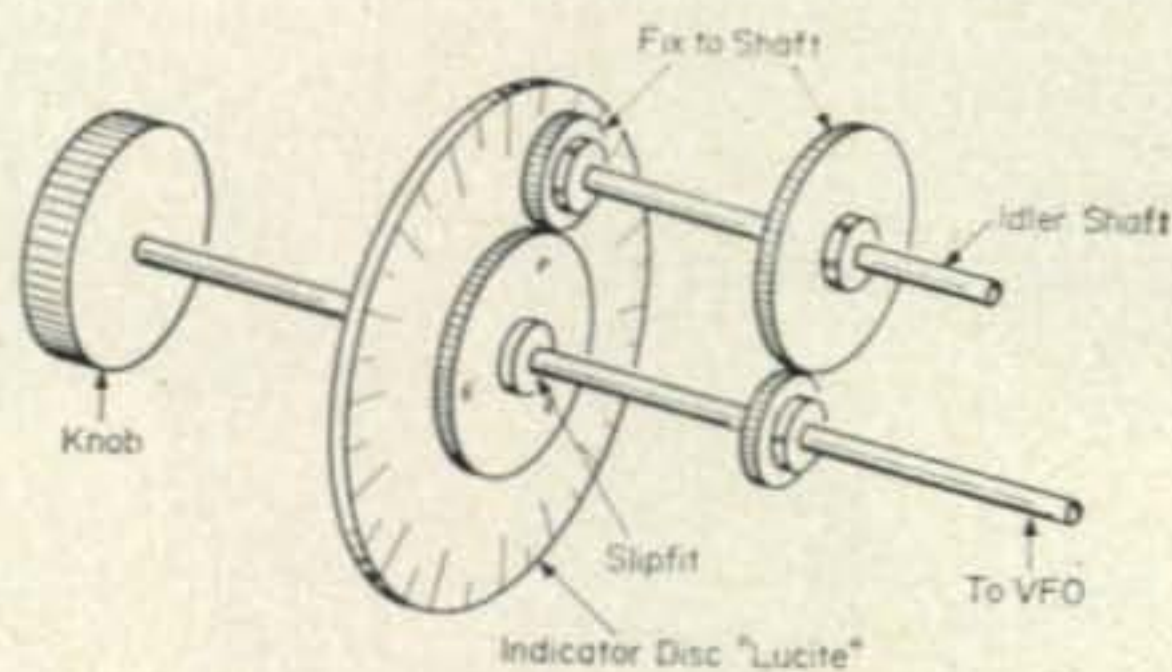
Mechanical arrangement for the gears and idler shaft. The indicator disc, made of lucite, is secured to the large gear which is slip fitted on the main shaft.
